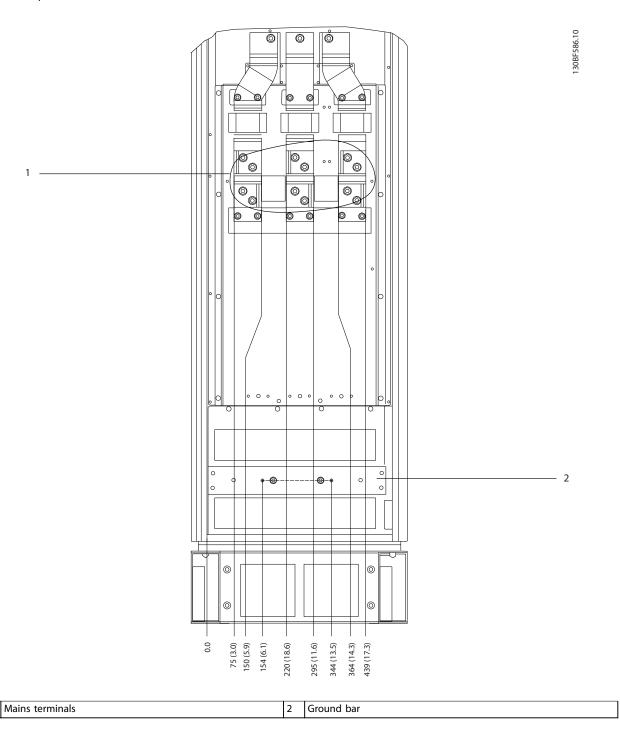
Terminal Dimensions for F3-F4 Options Cabinet, Front View
